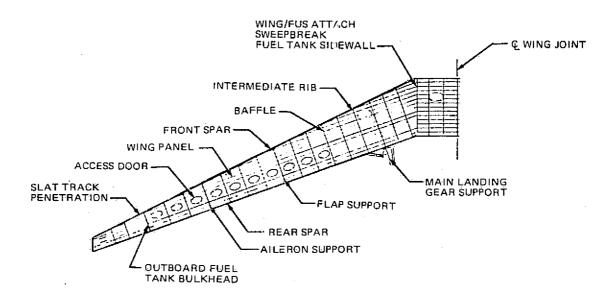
PRELIMINARY DESIGN LAYOUT SCOPE
